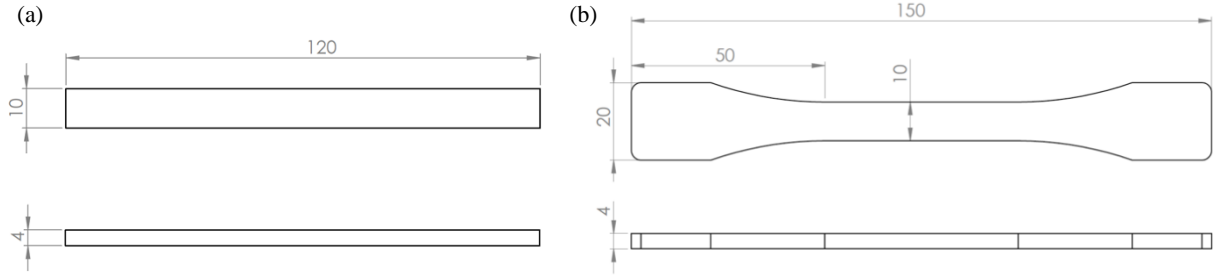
Drawings of the parts (dimensions in mm), rectangular-shaped specimen used for 3-point-bending test (a) and dog-bone-shaped specimen used for tensile test.
